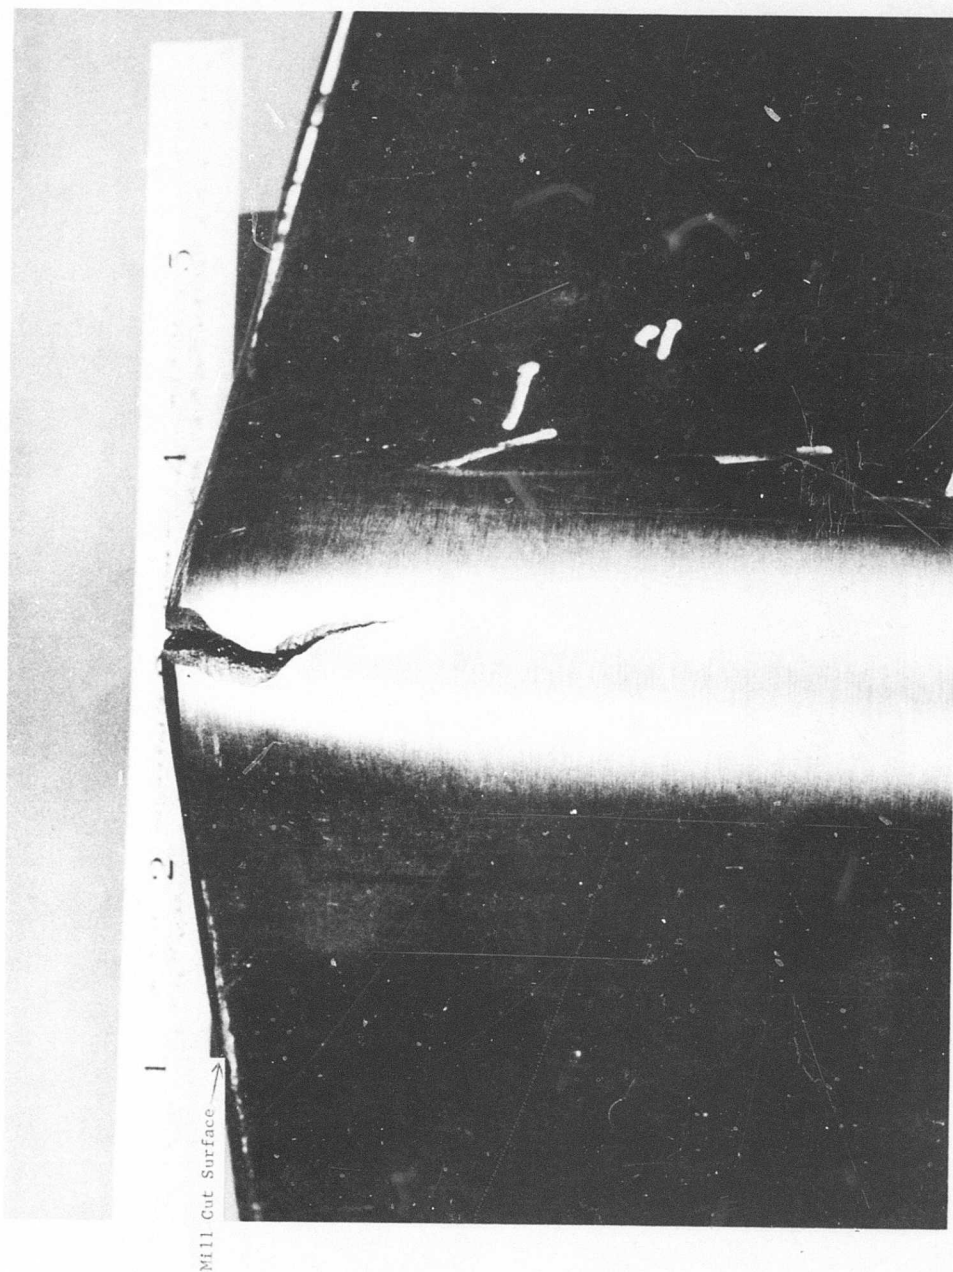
Crack Starting at Mill Cut Edge (Specimen L-1).
